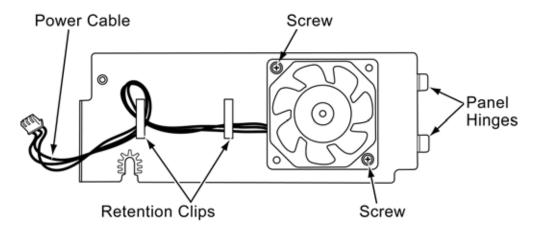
Chassis Access Panel Removed (19" Chassis)
